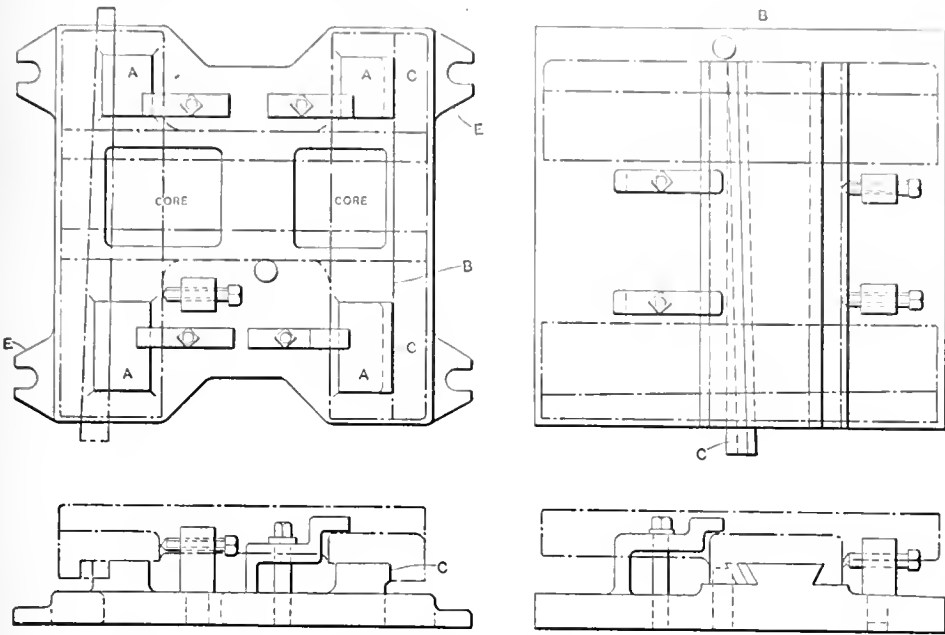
and 173. Fixtures for Planing the Dove-tail Slide and for Finish Planing the Ways of Carriage in Fig. 170.
